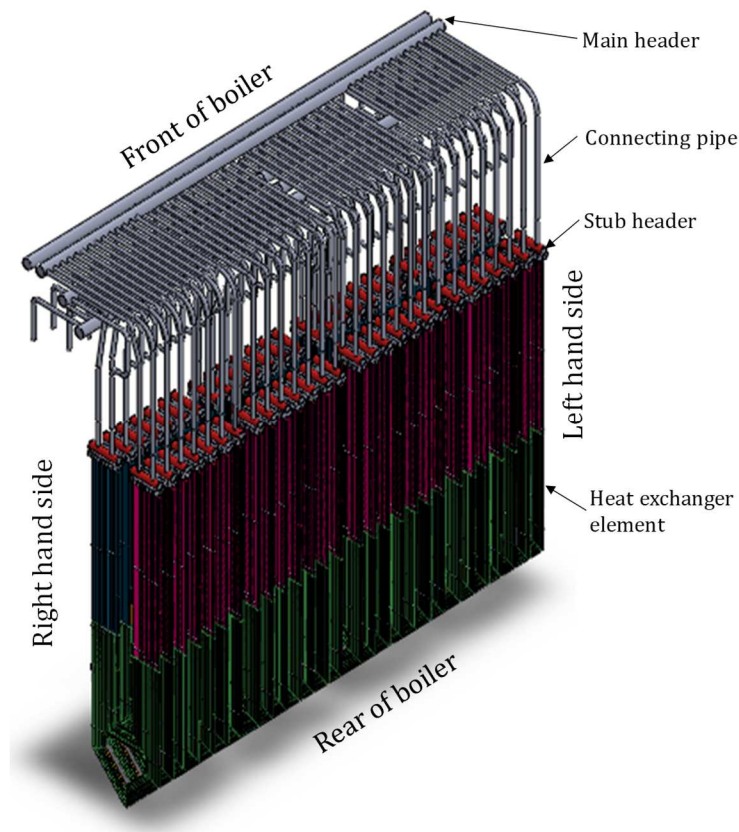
A three-dimensional CAD drawing of a superheater heat exchanger with sub headers.
